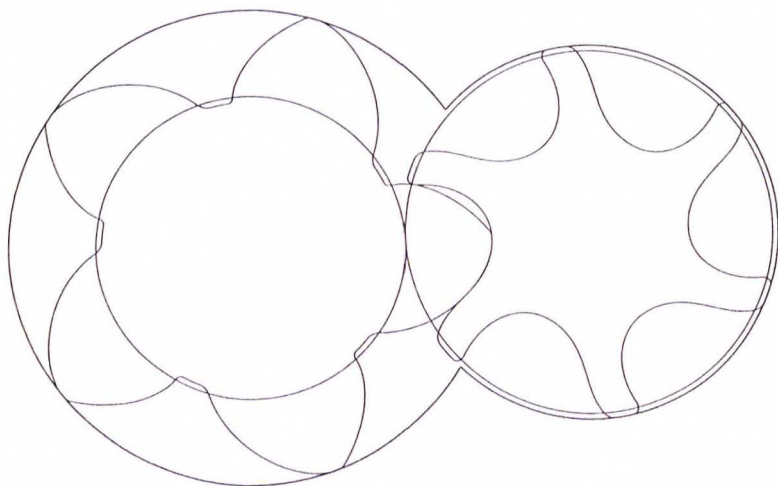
"N" Profile Rotors as Used in the Screw Compressor Tests
